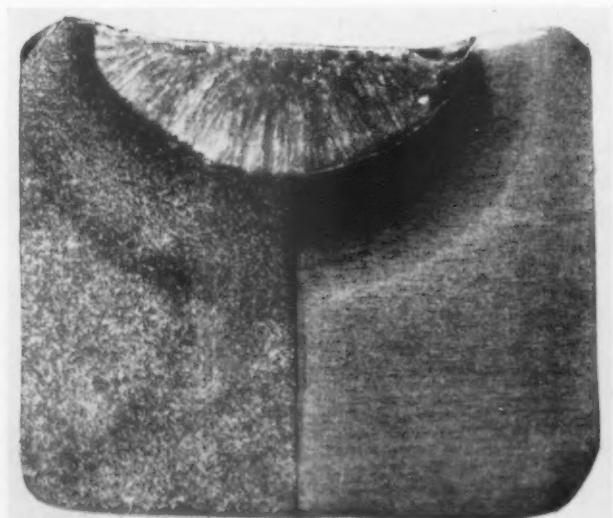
MACROGRAPH OF STEEL CC25 WELDED TO STEEL WSS WITH ELECTRODE 1. TAKEN AT END OF WELD, THREE-QUARTERS OF THE WAY AROUND THE BAR. NO PREHEAT. MAGNIFICATION: X4.
